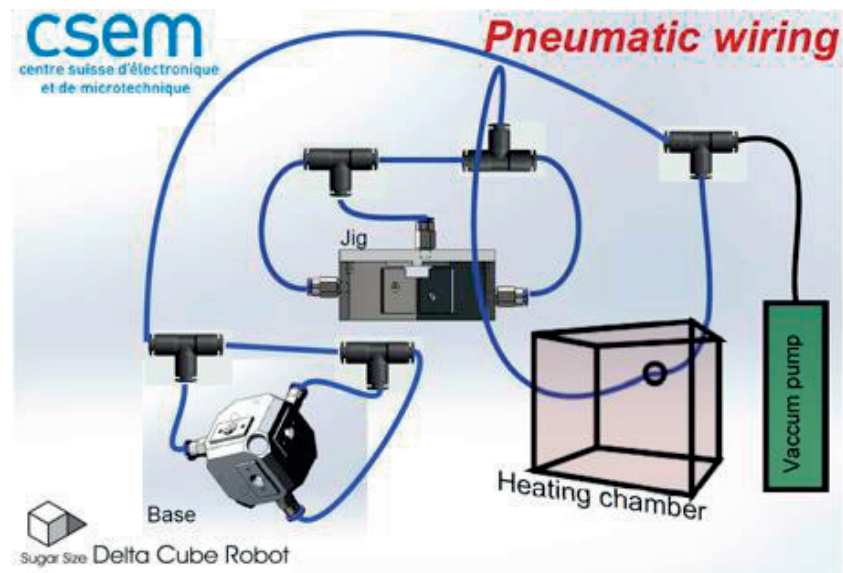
The assembly jig and base used for the preload and attachment of the sugar cube delta robot. Allowing for epoxy gluing, Uv gluing and soldering, of the sugar cube delta robot.
